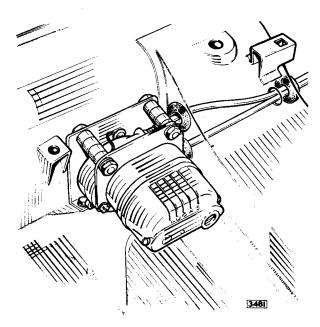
Mounting position and cable run for the electrically operated aerial (L.H. Drive),
